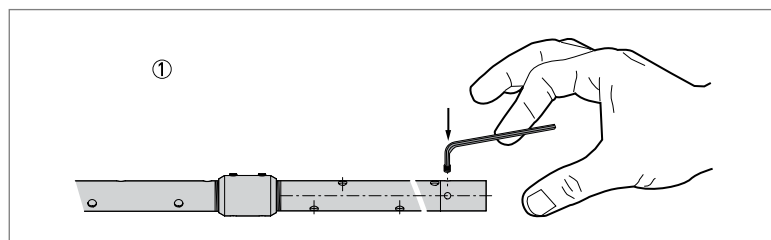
Assemble the Segmented Coaxial Probe Part 3
